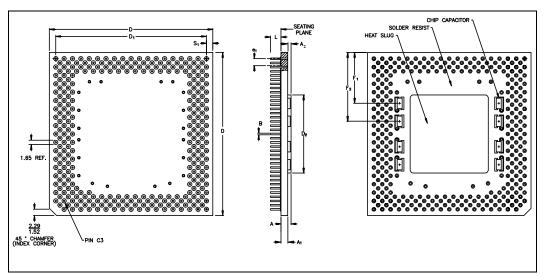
Plastic Pin Grid Array (PPGA) Package Dimensions
